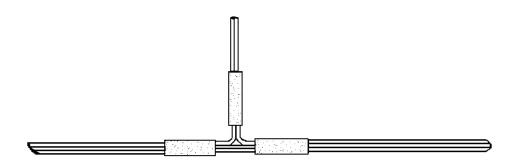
BUNDLING WIRE CABLE (TYPICAL)
